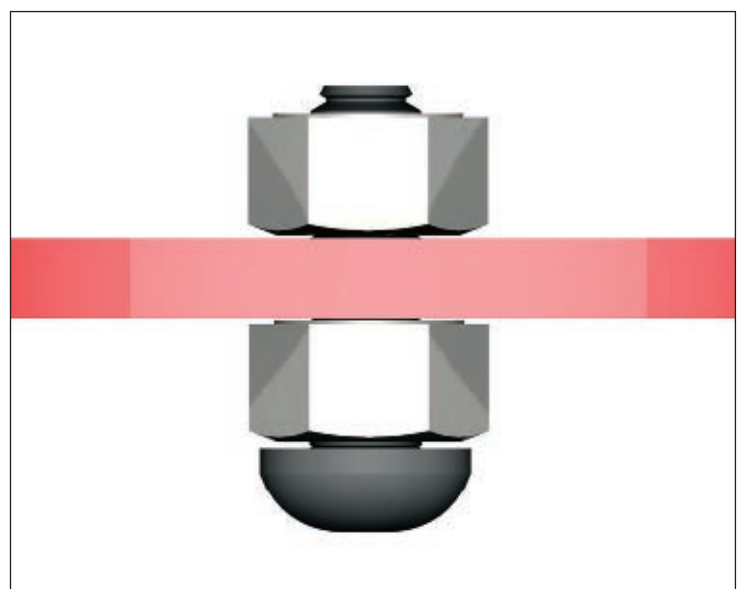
The balance skid is constructed using a pan head machine screw and two nuts. The head of the screw points down.
